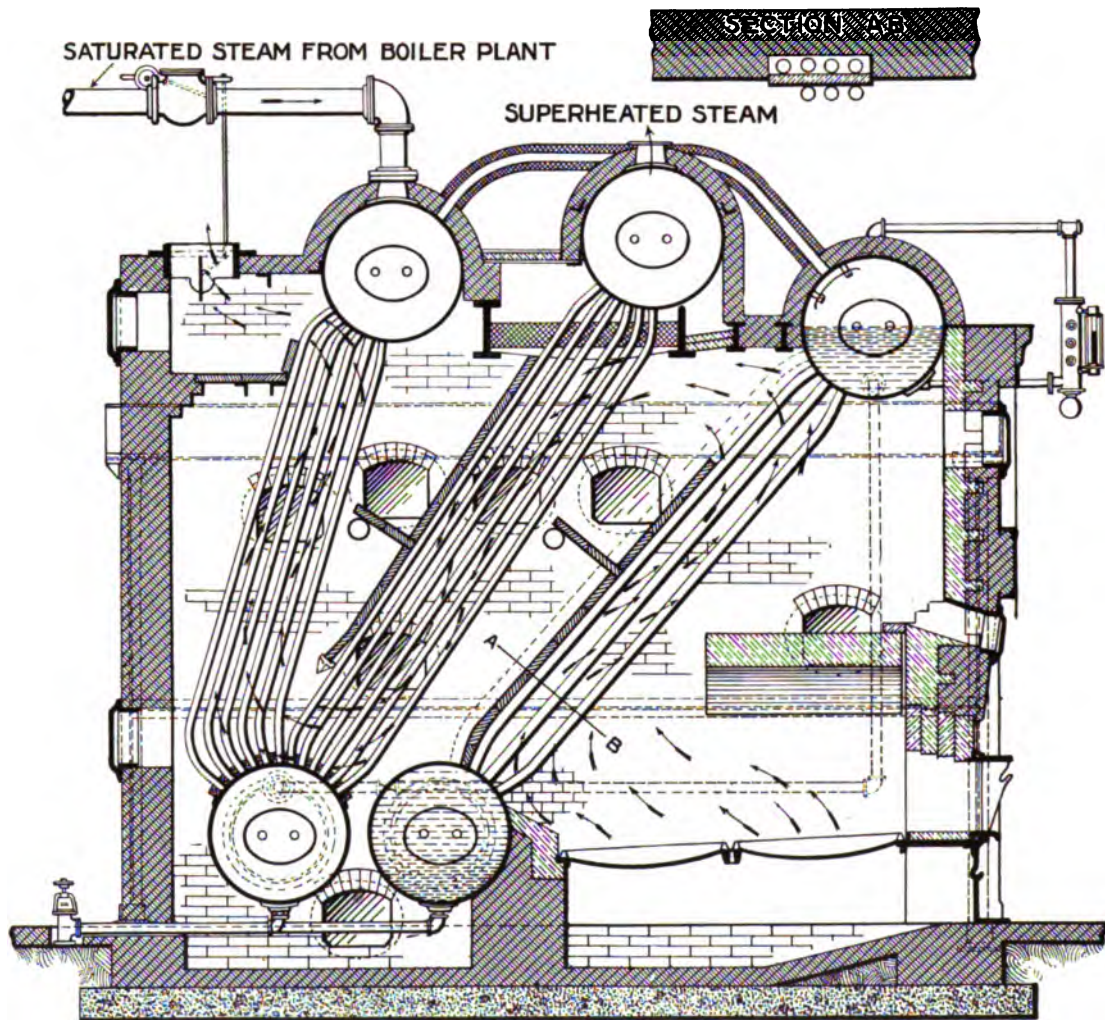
SECTIONAL SIDE ELEVATION OF THE STIRLING INDEPENDENTLY FIRED SUPERHEATER
